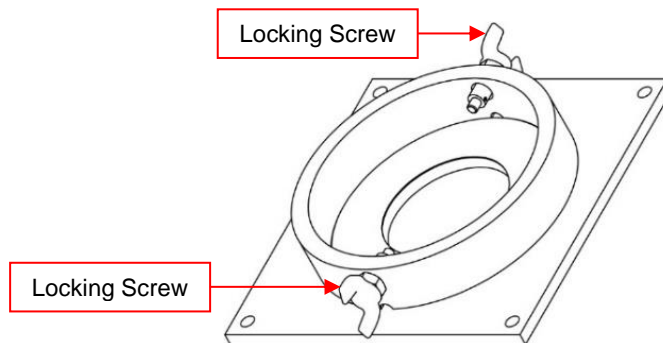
Locking Screws (P/N: 5074601 Shown)
